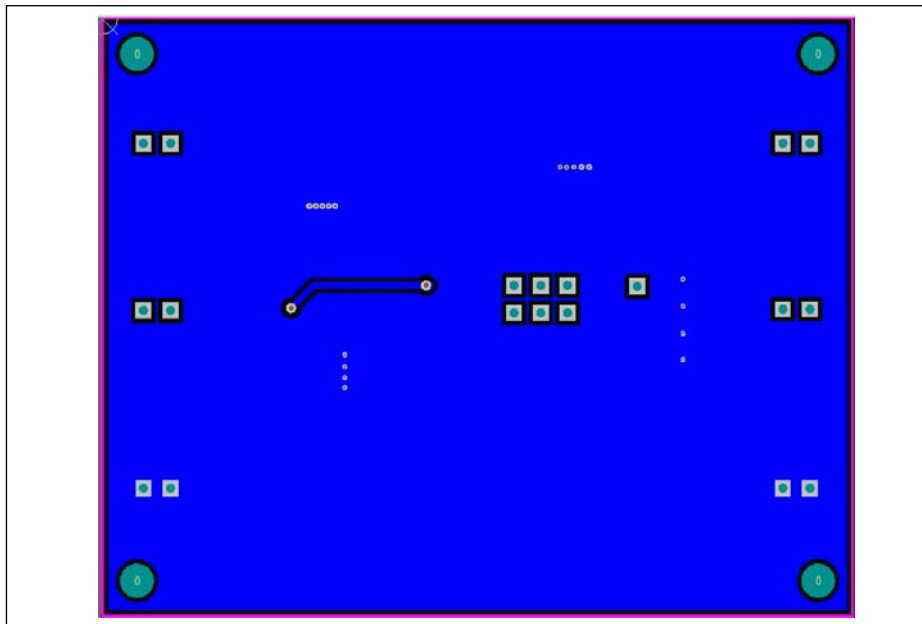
Board PCB Layout - Bottom Layer (SOT23-6)
